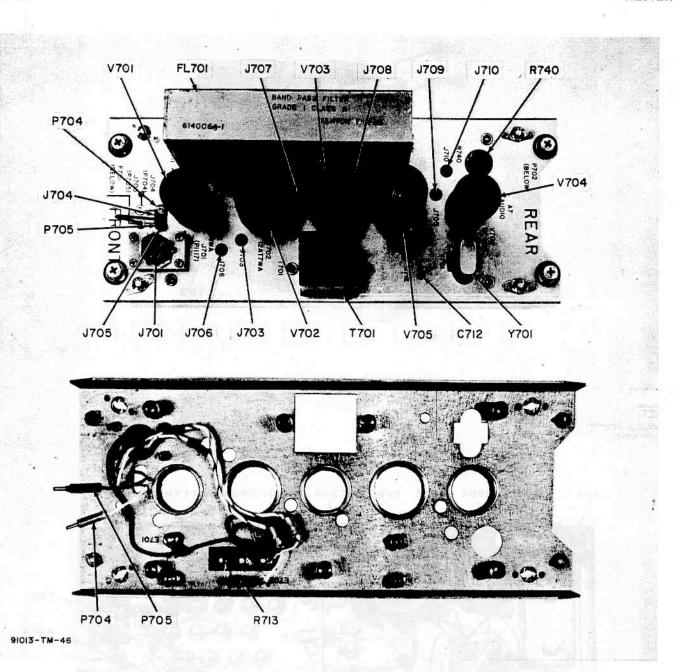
AF Amplifier. Top View and Bottom View with TB 701 Removed
